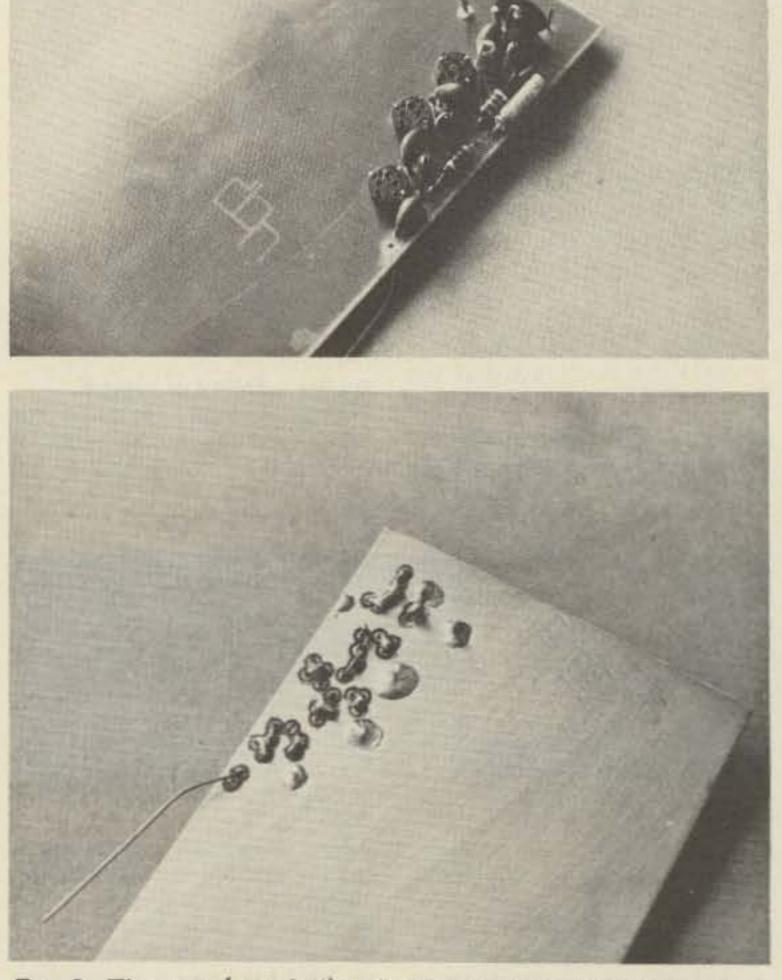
The top (non-foil) side of a board containing a three stage amplifier, and the bottom (foil) side showing the isolated pad interconnection points.
